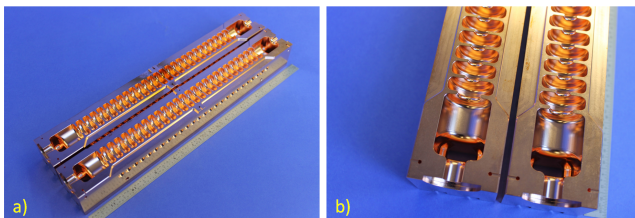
a) Two halves of the accelerating structure after machining. b) Input part of the structure zoomed on integrated milled-mode-launchers.
